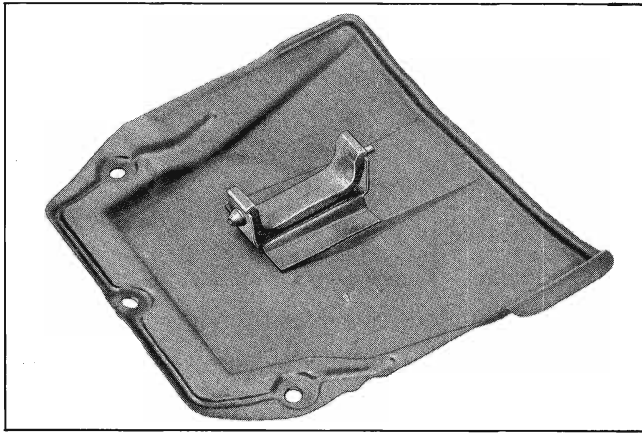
Engine Fan Top Shield Assembly (Underside)
